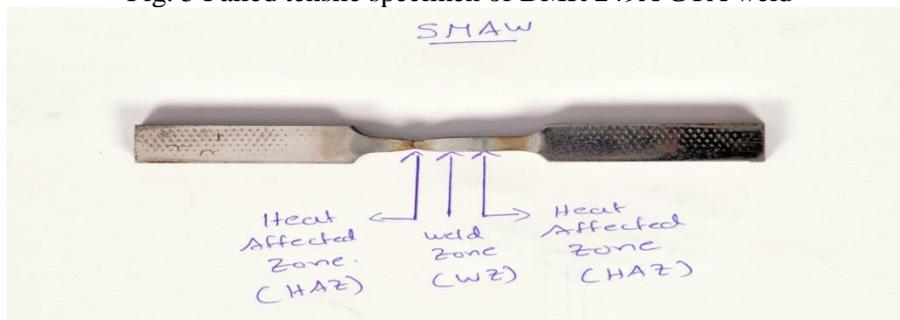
Failed tensile specimen of DMR 249A SMA weld
